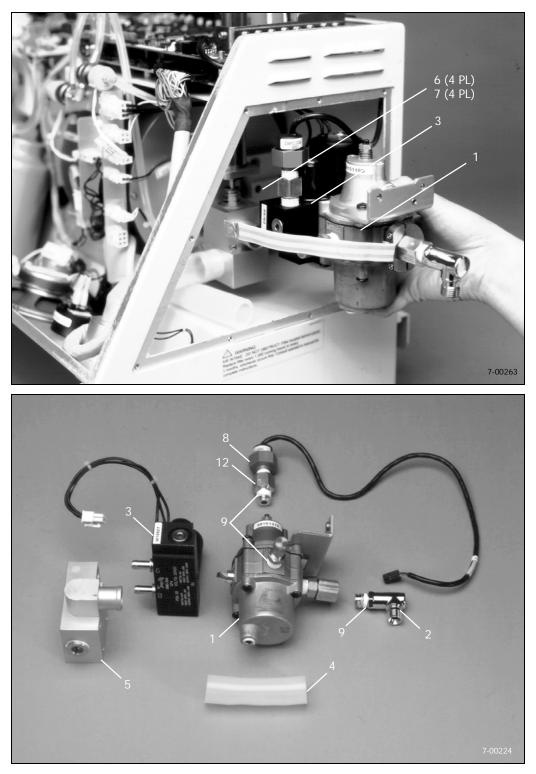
Oxygen regulator and oxygen solenoid assembly
